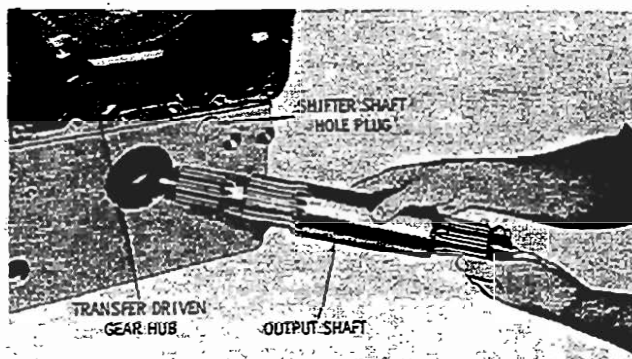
INSTALLING ONE-PIECE OUTPUT SHAFT
